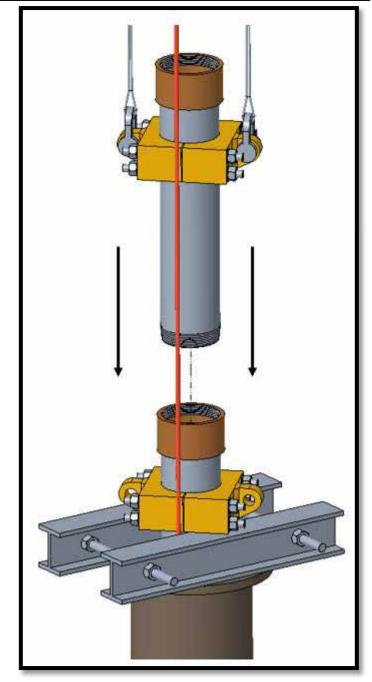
Finished Assembly showing partial pump assembly resting on I-Beams.
